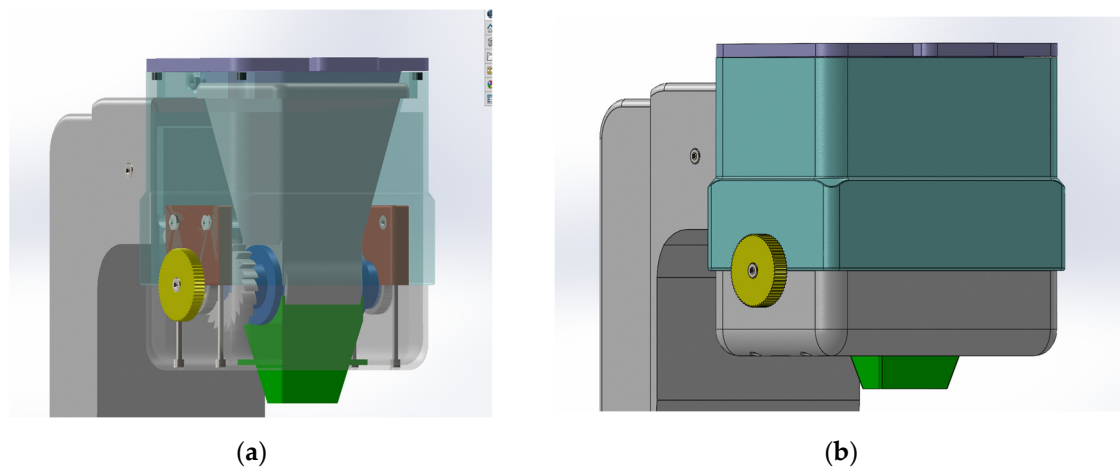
The dispensing part of the device (a) The dispensing mechanism (b) The upper part of the dispenser in which the dispensing mechanism is located.
